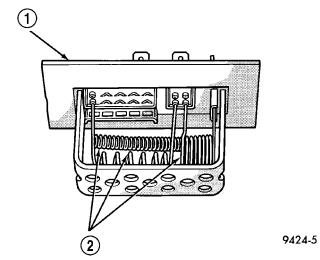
BLOWER MOTOR RESISTORS - (TYPICAL)
